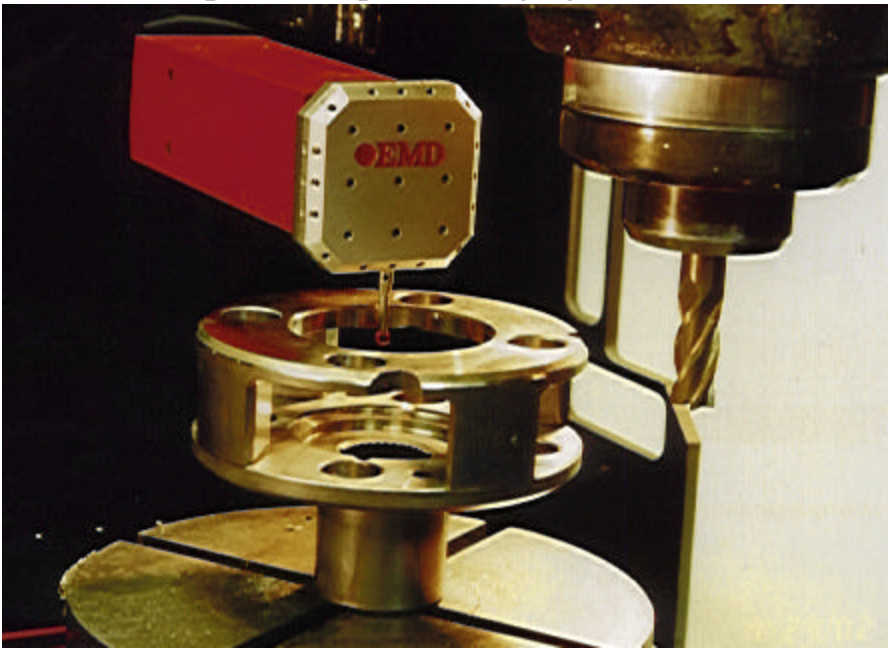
Close up of Workpiece, Gauging Module Head, and Milling Head
